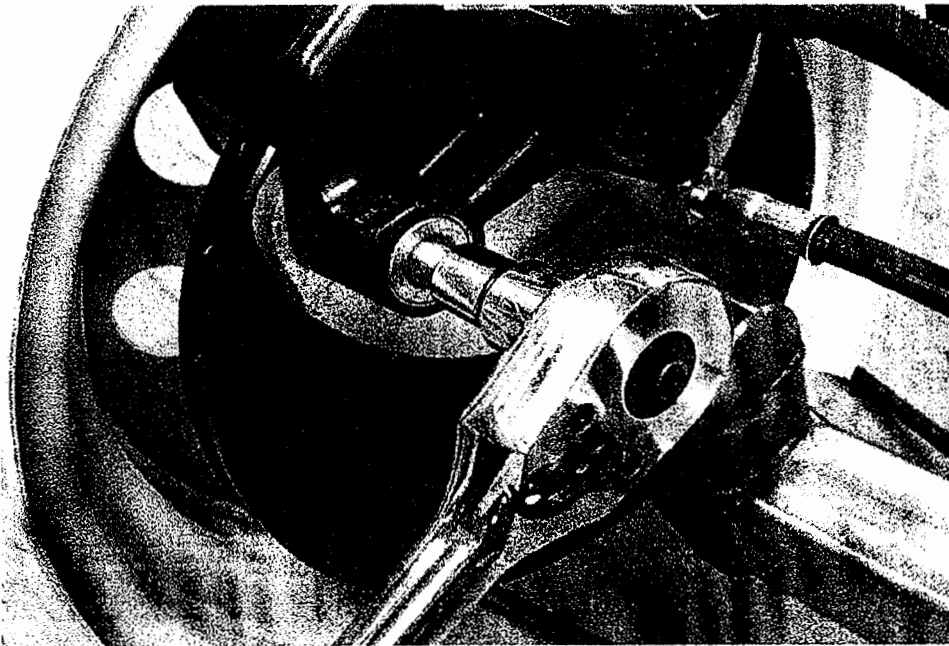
Using the Socket/Ratchet Drive Tightened the Slider Pin.
